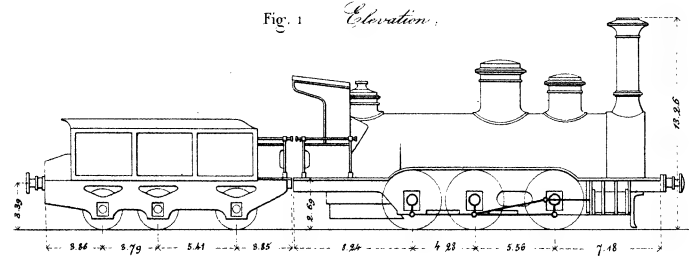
Elevation.*Fig. 15. *Plan.
